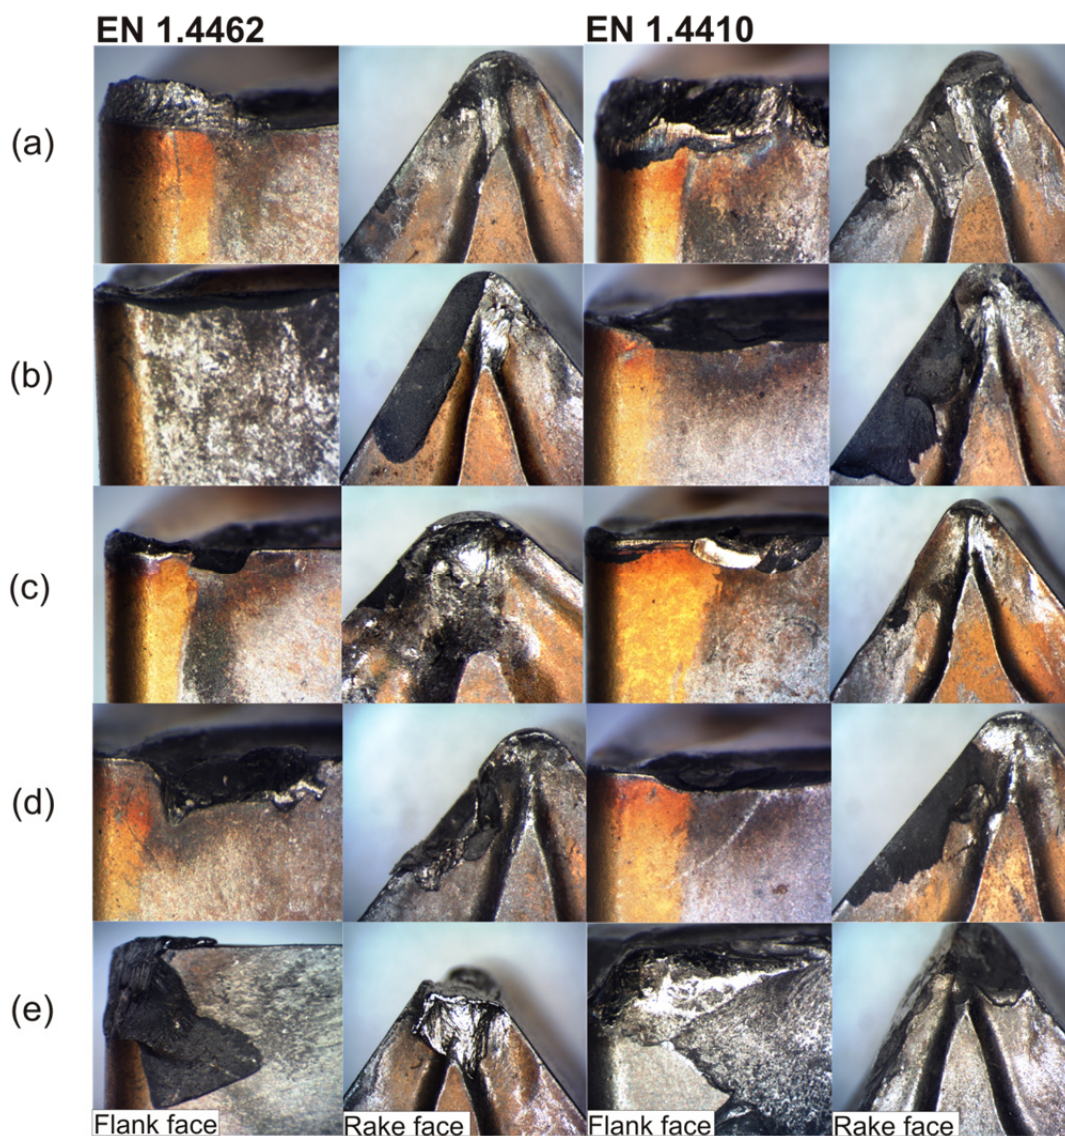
Wear patterns observed on the flank and rake face of cutting tools under dry and wet machining of DSSs using CNMG 120408-MM 2025 coated carbide tools.
